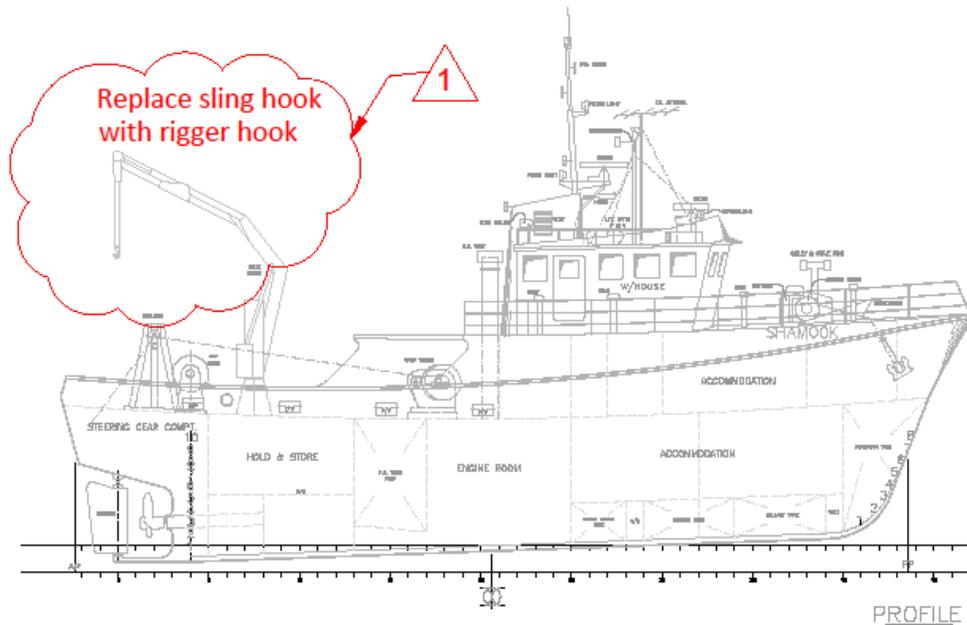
Example of “Replace” mark-up to the content of a technical drawing in the drawing area
